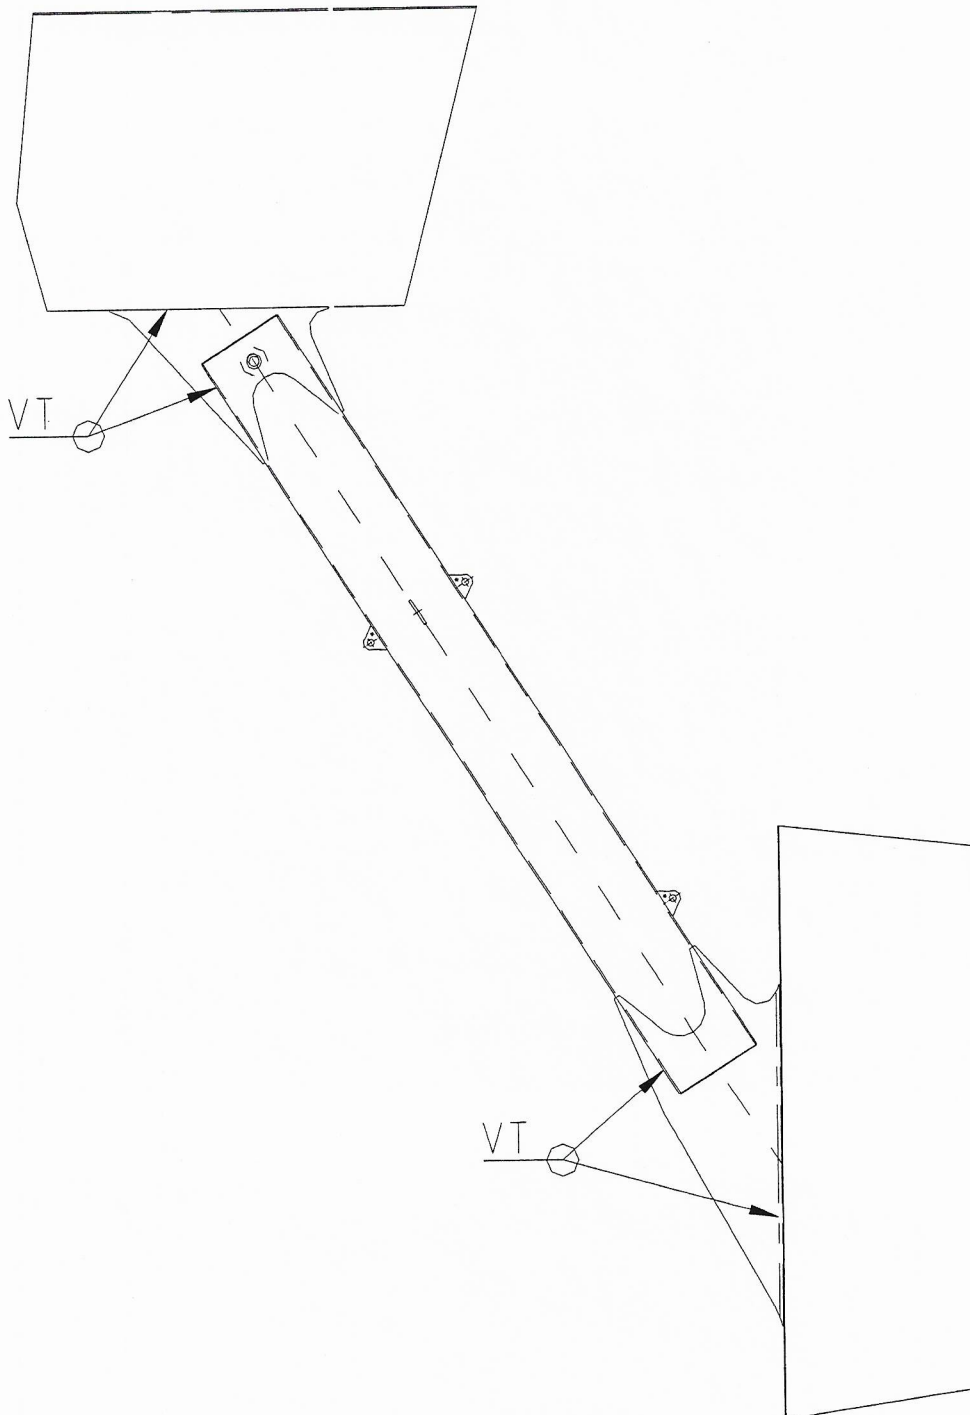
Joints of Landside Leg, Horizontal Beam and Diagonal
